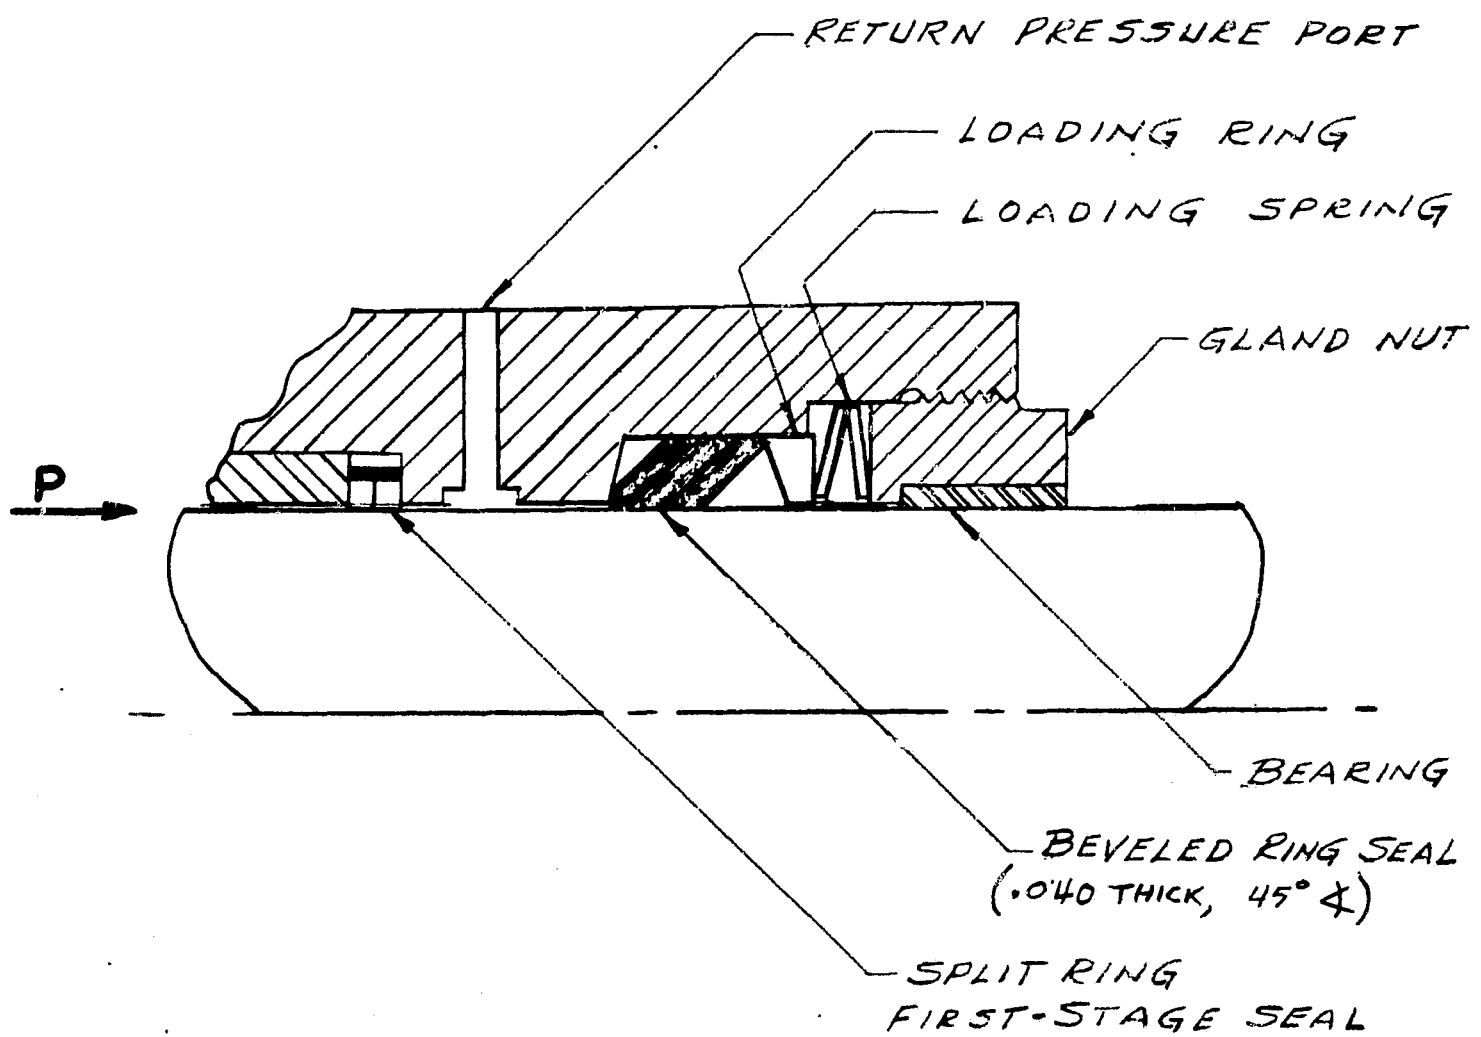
Design C - Bevelled Ring Seal (Soft Material)
